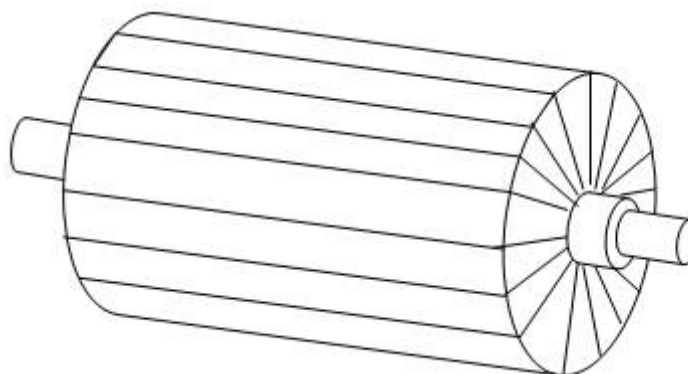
3D view of smooth cylindrical or non-salient type rotor
